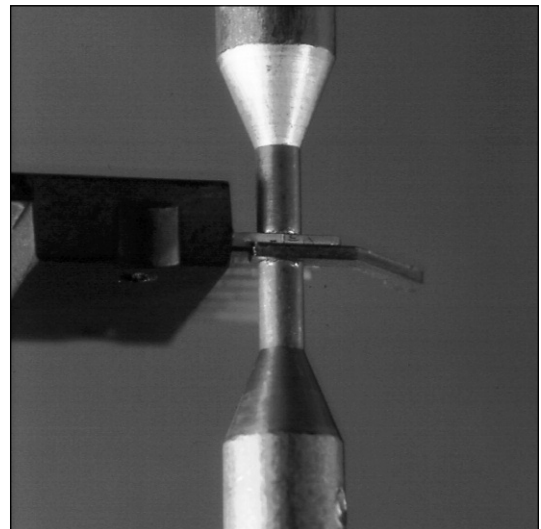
Tin plated brass terminal to tin plated copper terminal using Constant Power mode. HF2 Power Supply, X11/4000A Transformer, Series 300 Weld Head.
